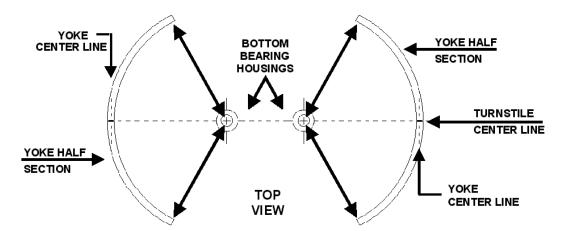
"Squaring the yokes." The yokes should be positioned such that each set of half yokes are flush together at the intersection of the turnstile and yoke center lines and the center of the nearest Roto bottom bearing housing is equidistant to the outer edges of the yoke assembly.
